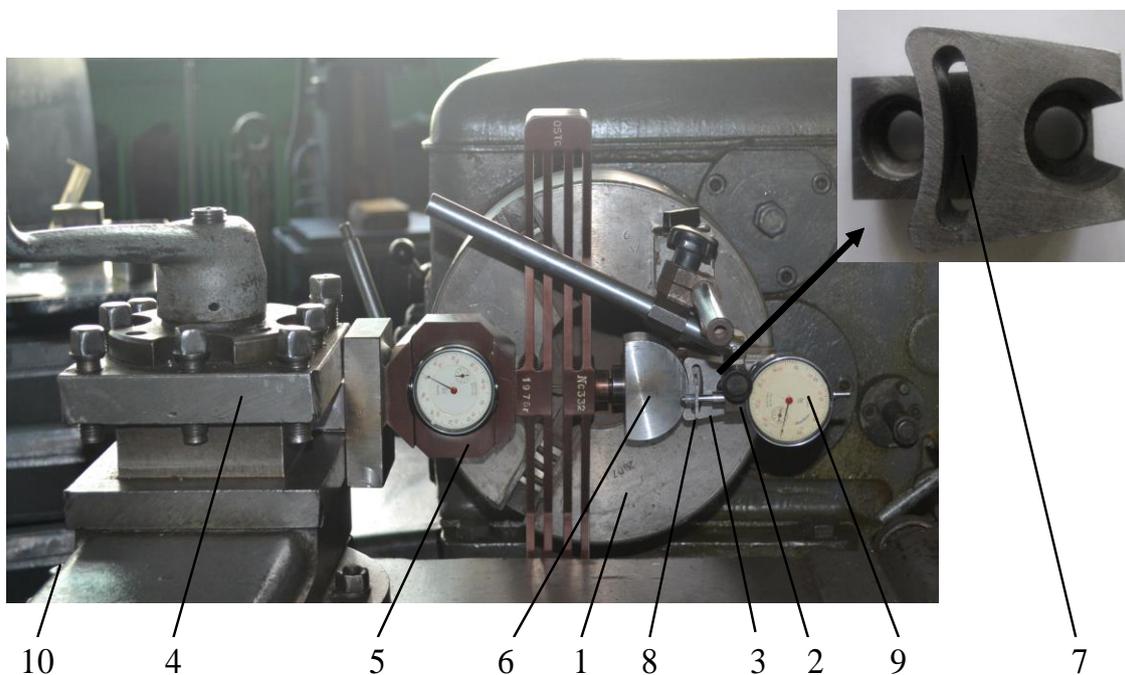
Experimental stand for measuring the displacements of the most deformed part of the adaptive clamping jaw annular segment of clamping zone
